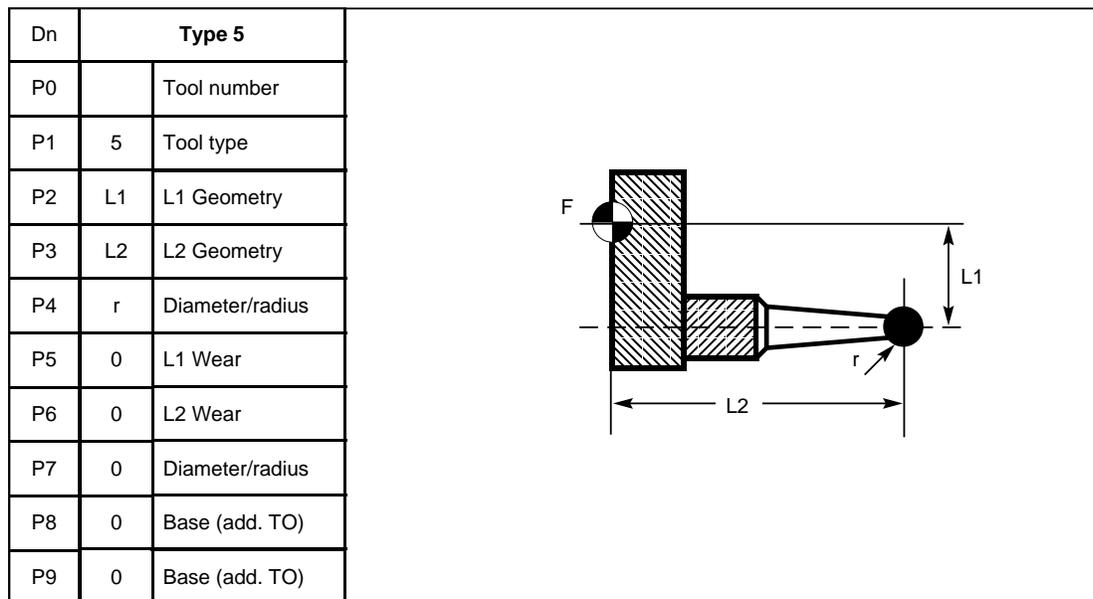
Workpiece probe type 5 in the TOA memory for turning machines
